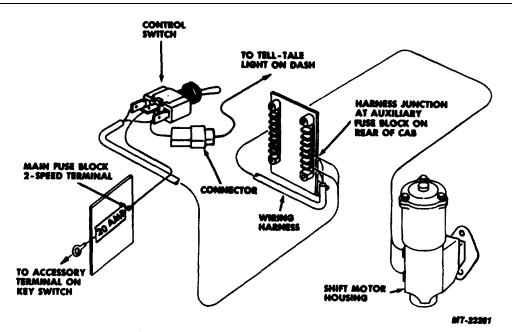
Electric Shift System (Tandem Axle Power Divider Lock Type Shown)
